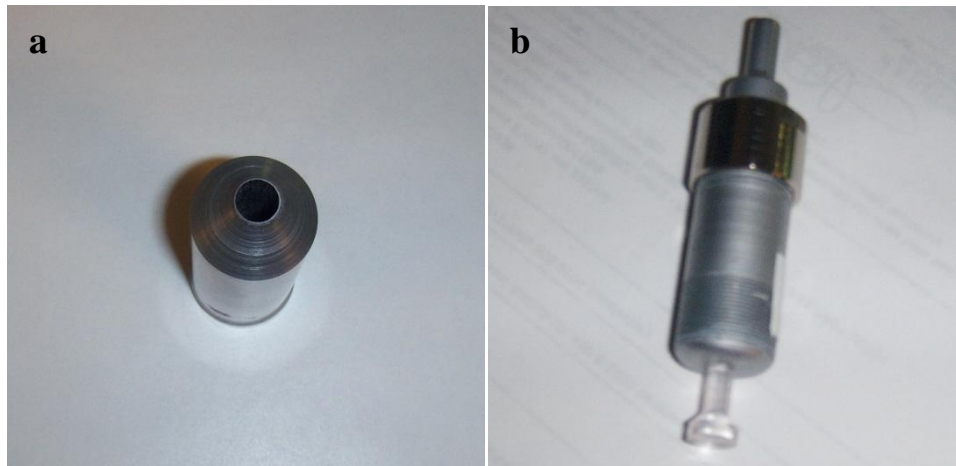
Hole punch used to create 0.300" diameter sandpaper segments (a). Engraving tool-polishing bit assembly where the punched sandpaper is placed at the bottom end of the polishing bit (b).
